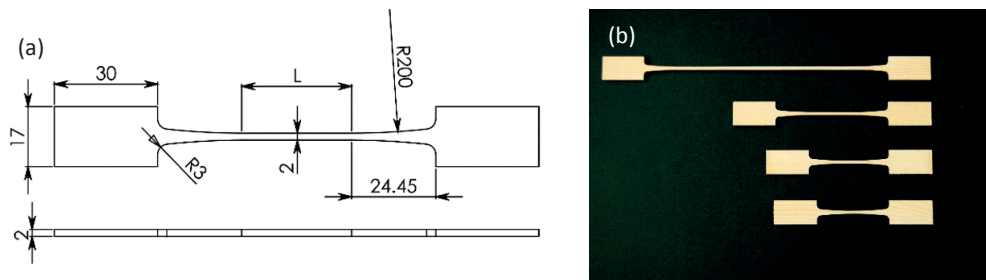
a) Dimensions of specimen used for longitudinal tensile test, in millimeters b) Fabricated specimens of different lengths.
